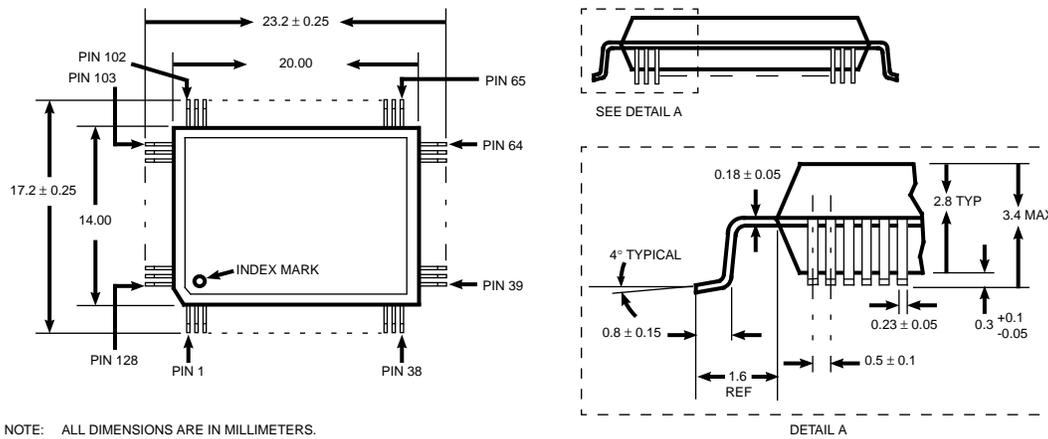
FAS366/366U 128-Pin PQFP Mechanical Drawings
